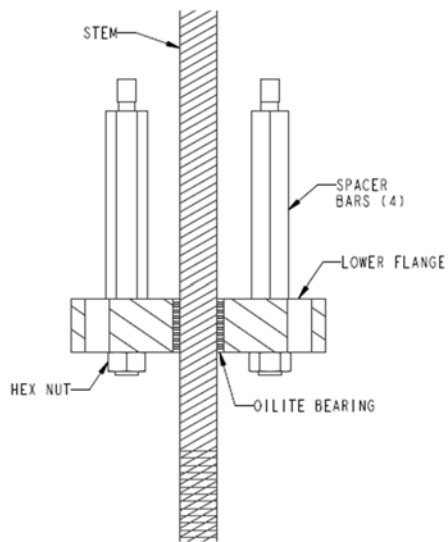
GB50/53 SERIES ACTUATOR OPTIONAL SPACERBAR ASSEMBLY
